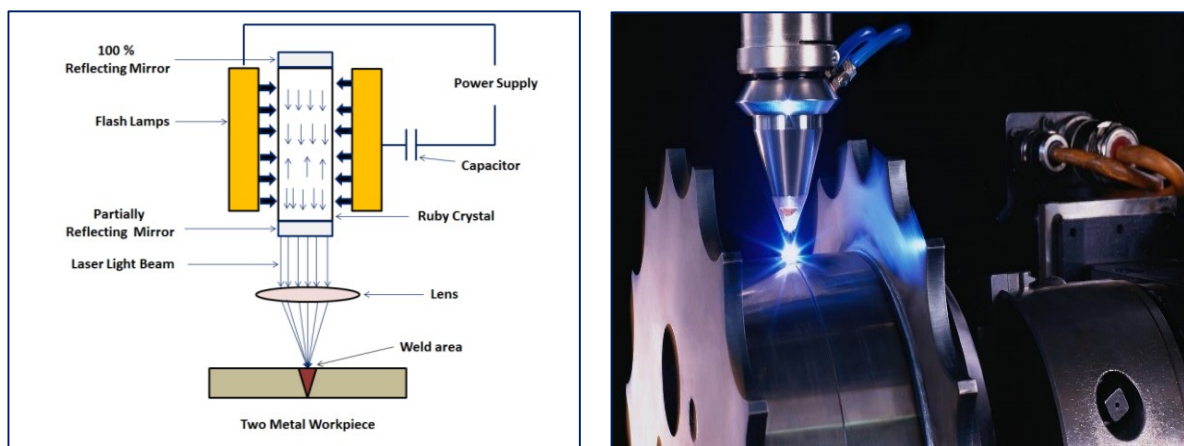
Laser Beam Process and Tools [38] [39]
